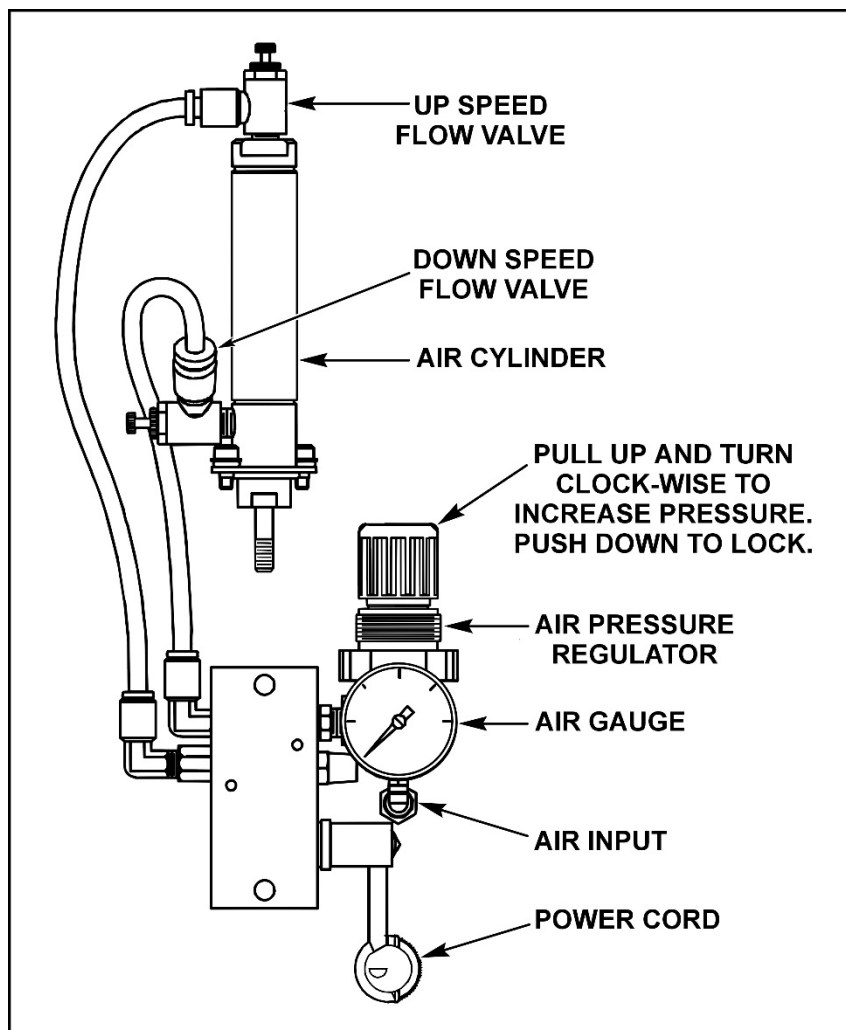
Solenoid Air Valve Assembly for Thinline Model 80A
